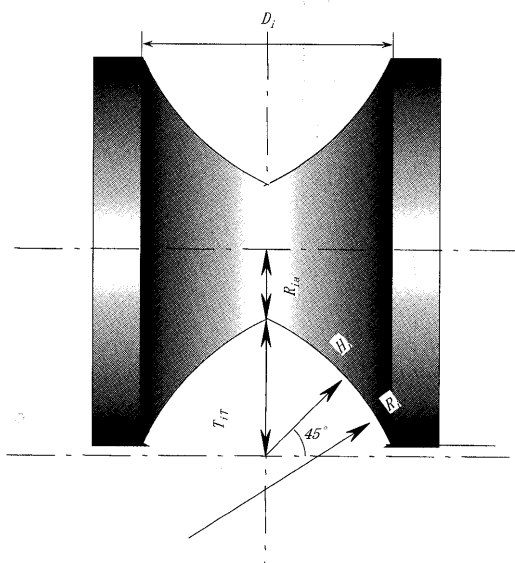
Roll groove used for forming square cross-sectional tubes in the sizing mill.
